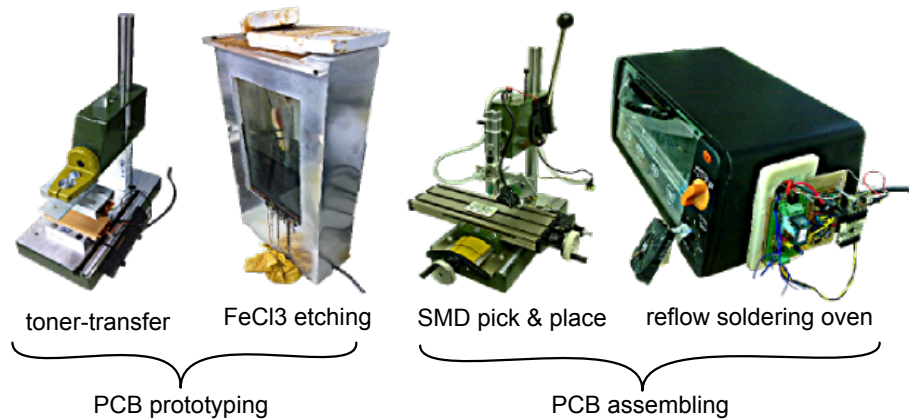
The low-cost PCB prototyping and assembling tools used in this work
